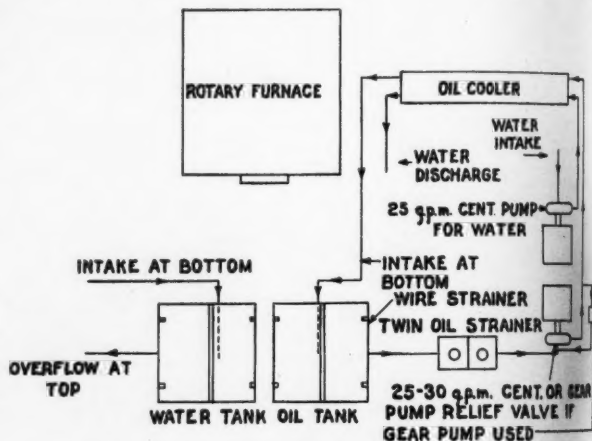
Layout for Rotary Carburizing Furnace and Accessory Equipment.
